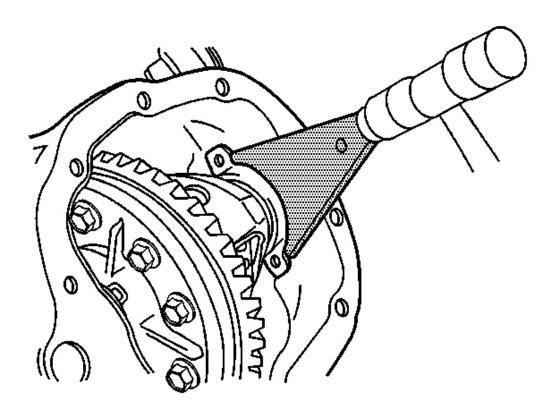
Installing The Left Side Service Shim Using J 25588 Courtesy of GENERAL MOTORS CORP.
